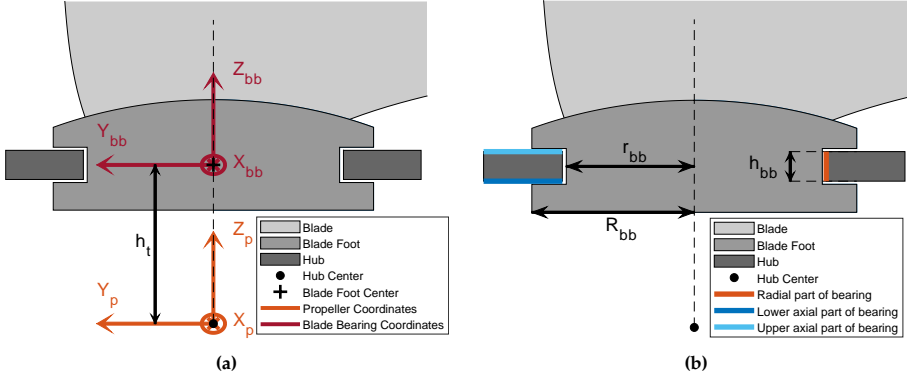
(a) The blade bearing coordinate system relative to the propeller coordinate system. (b) Notation and definitions used for the blade bearing.
